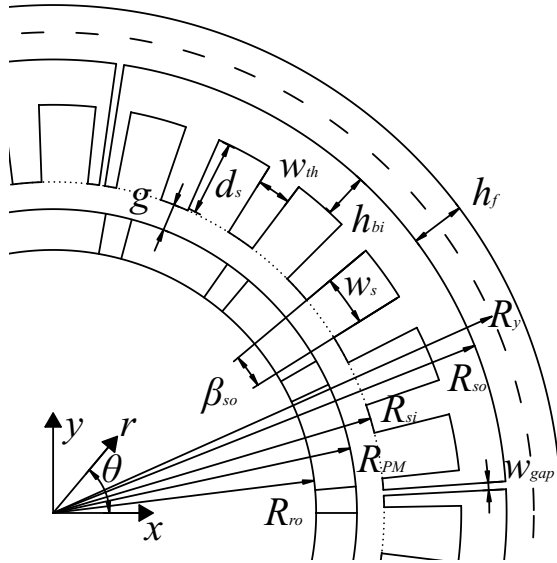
Layout of the electrical machine with an explanation of the geometric parameters.
